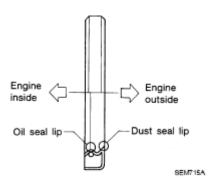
Applying Engine Oil To Both Oil Seal Lip And Dust Seal Lip
